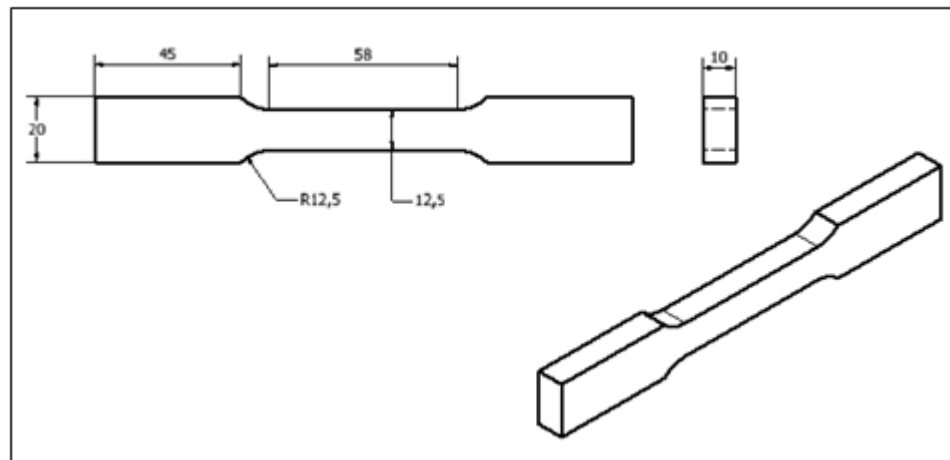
A drawing of the dimensions of the tensile samples machined from the respective service exposed steam pipe samples.
